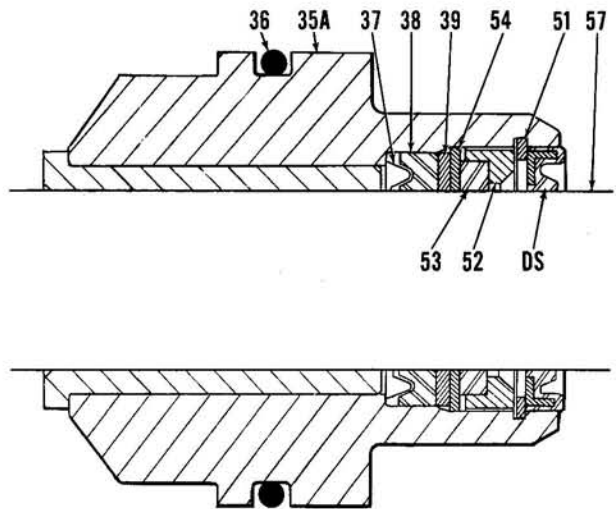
Cross-sectional view of cylinder and control valve assembly. Refer to Figs. 14 and 15 for legend.
